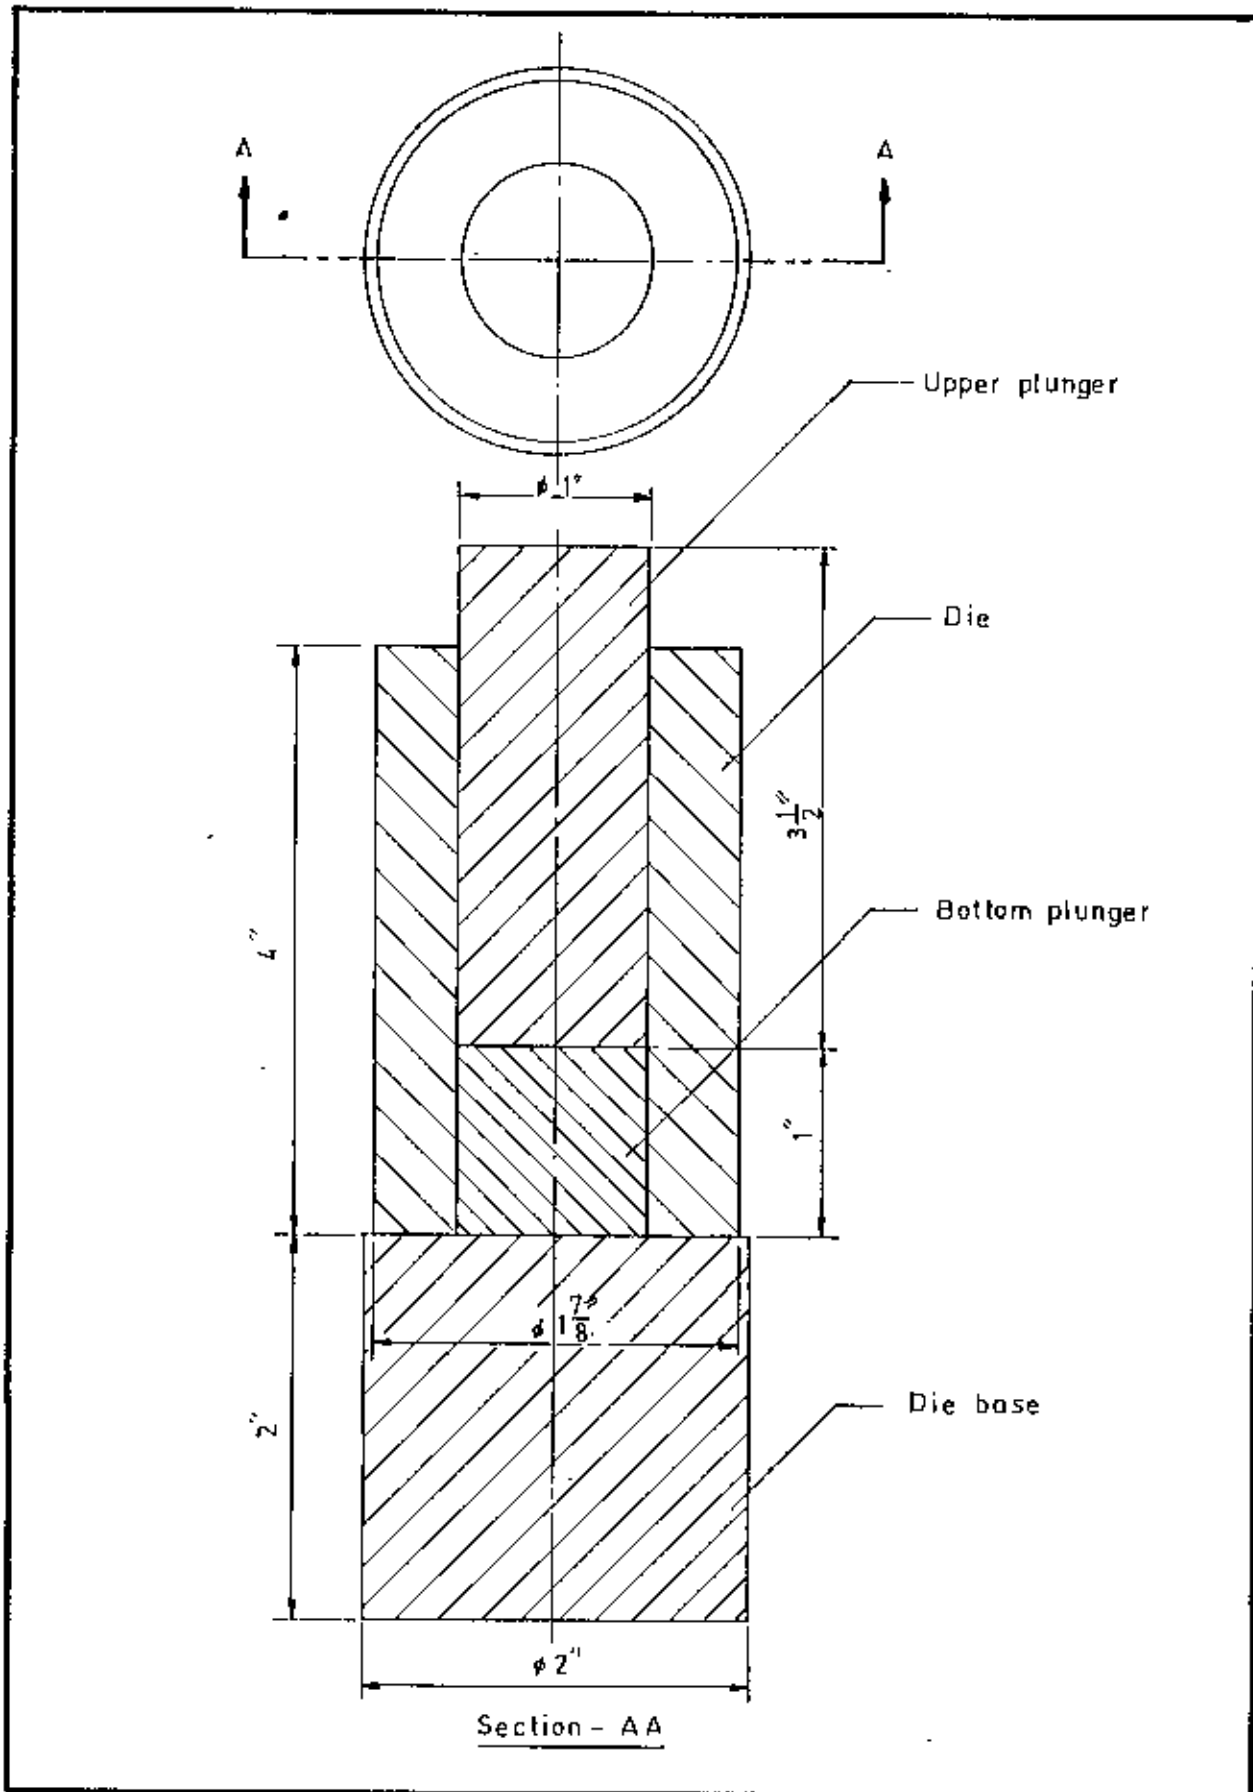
HOT PROCESSING DIE ASSEMBLY
